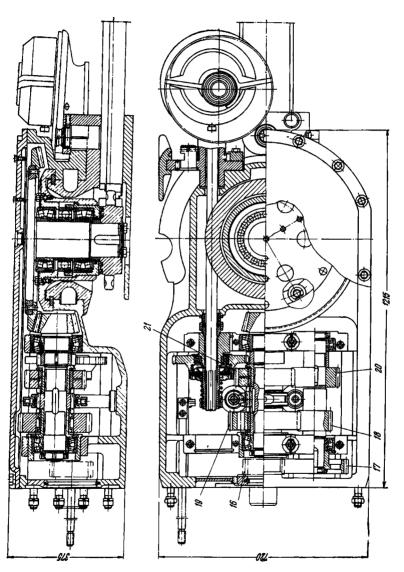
Cutting-head gear box of KMII-2 (KMP-2) coalcutter
